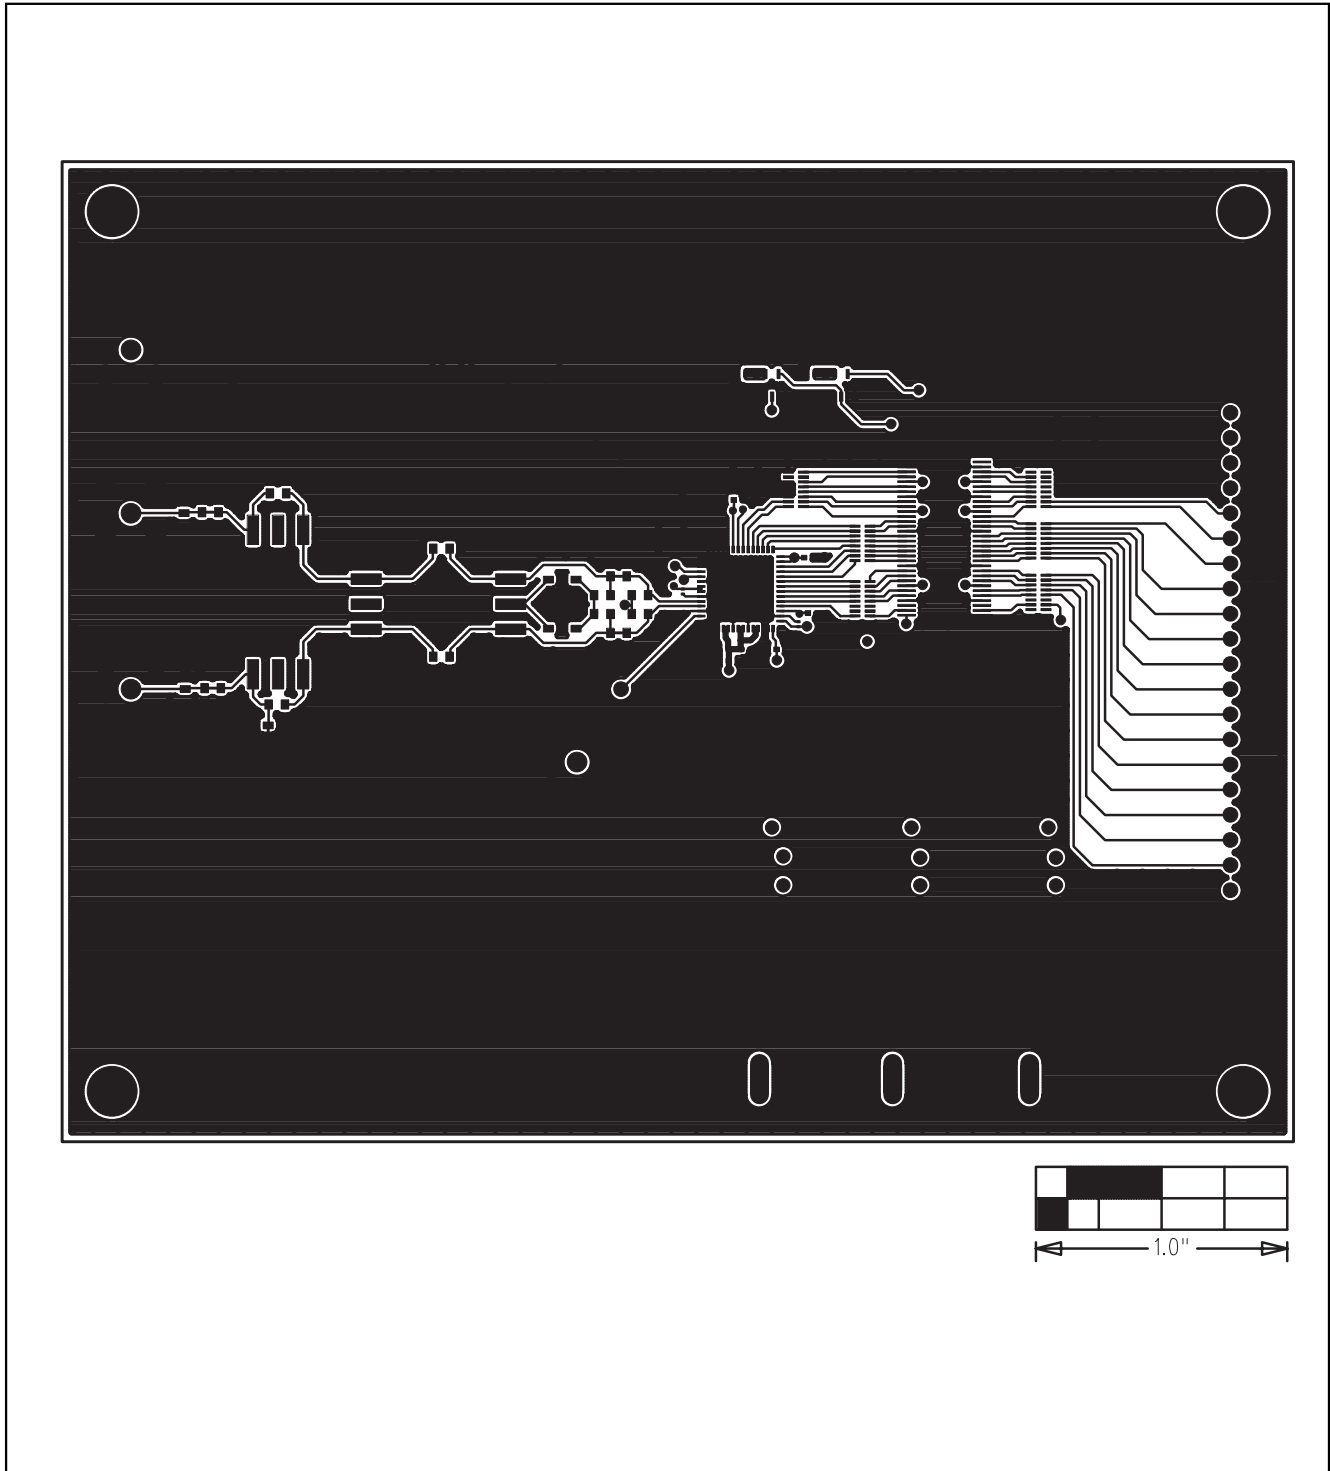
MAX1427 EV Kit PC Board Layout—Component Side
